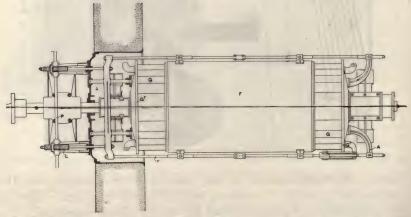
Plan of Double Wheel With Common Draft Tube (see page 517).
